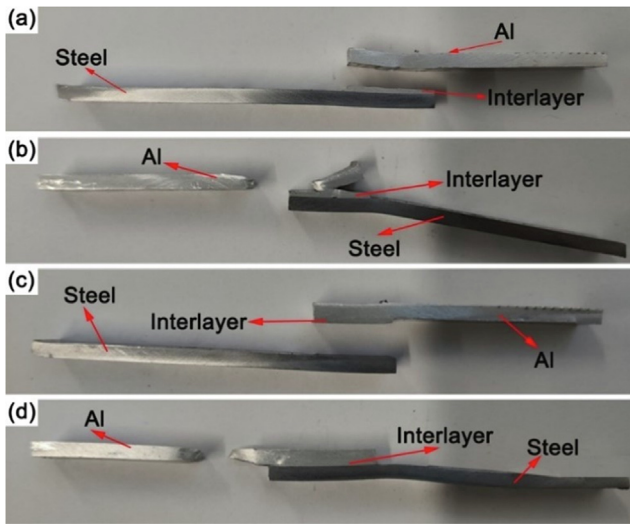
The typical fracture locations of aluminum-steel joints. The fracture location (a) at the Al-interlayer interface, (b) on hook defects of RS, (c) Al-steel interface, and (d) aluminum alloy base metal.
